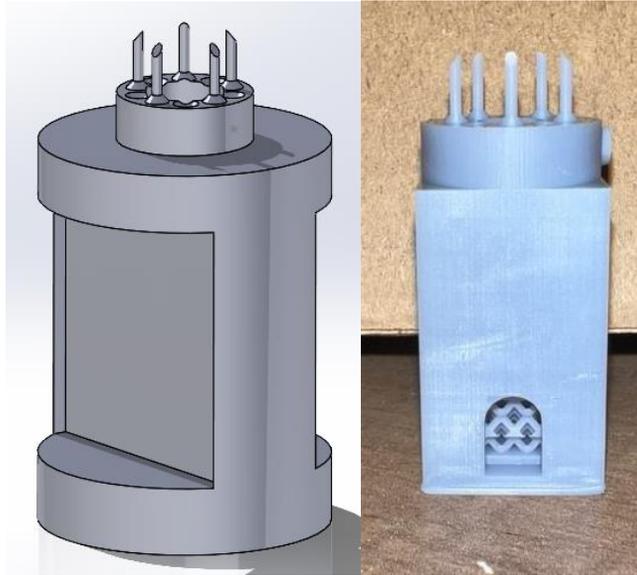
Connection Force Testing Fixture: Solid works first sketch (left), Model used in Testing (right)
